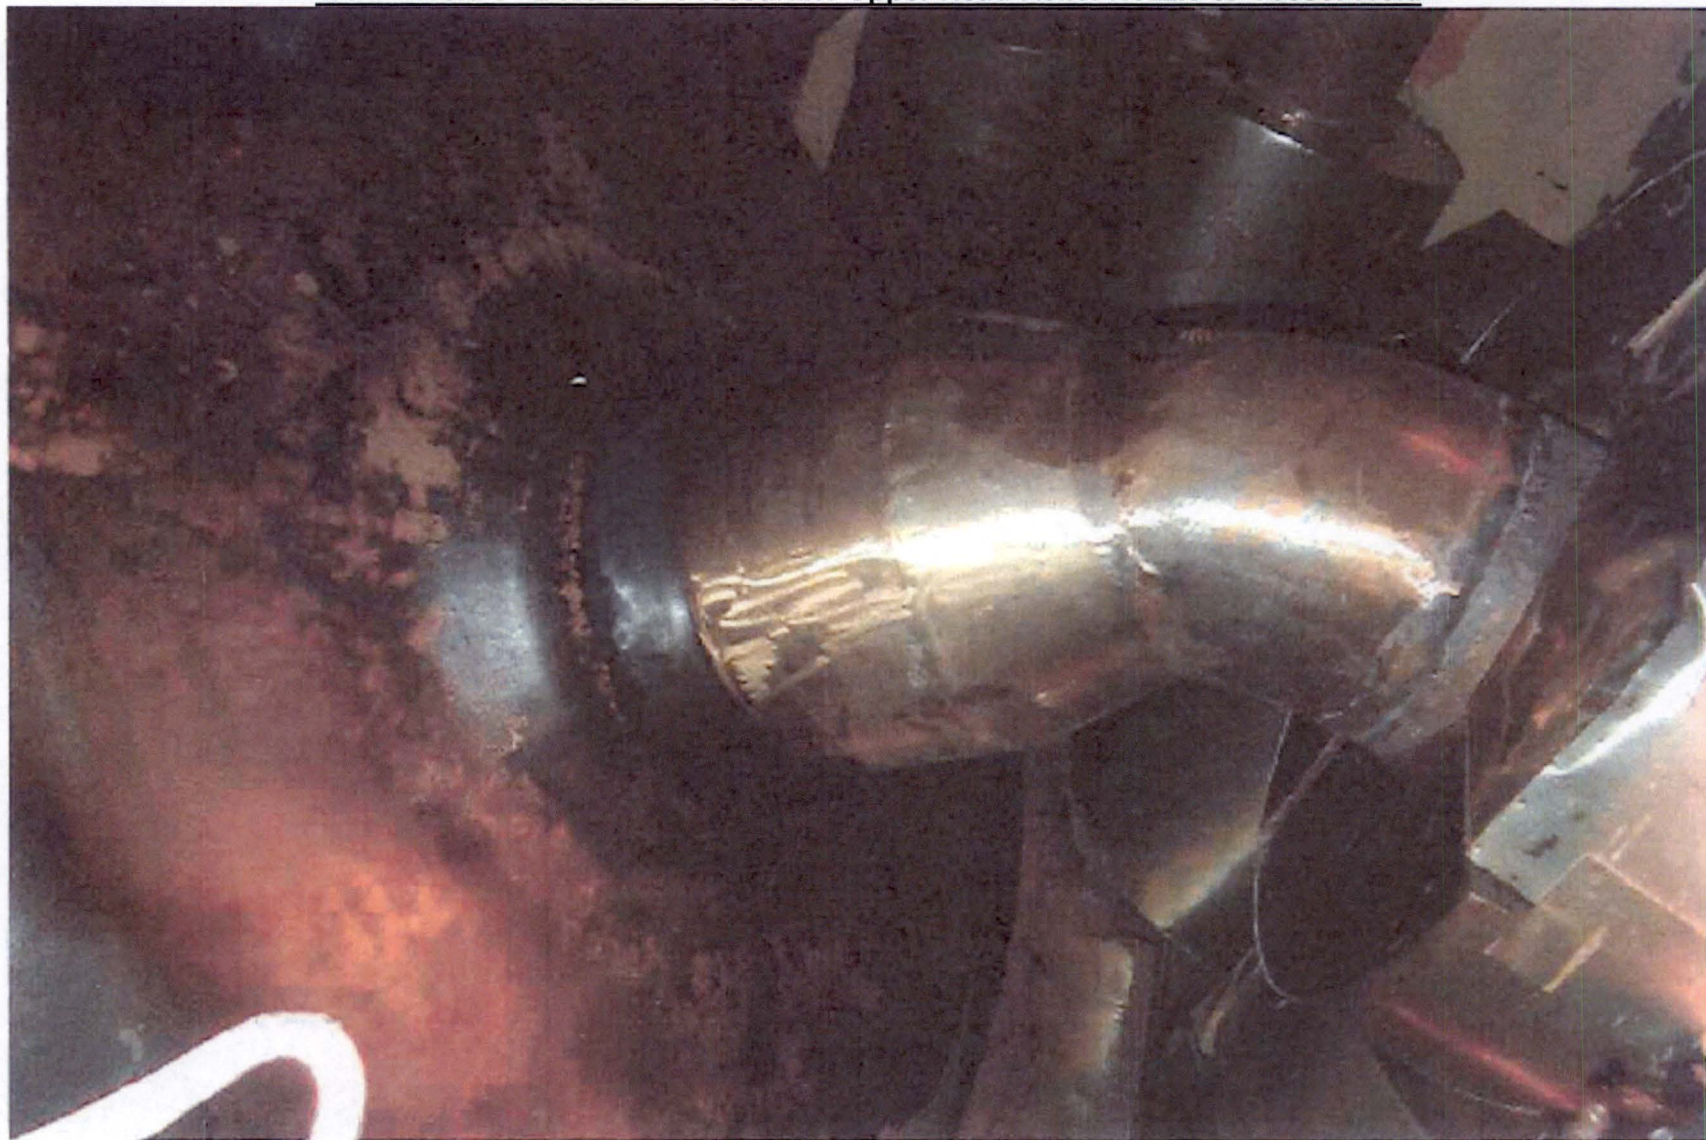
Weld 6"-2-RC-26 Component Photograph
